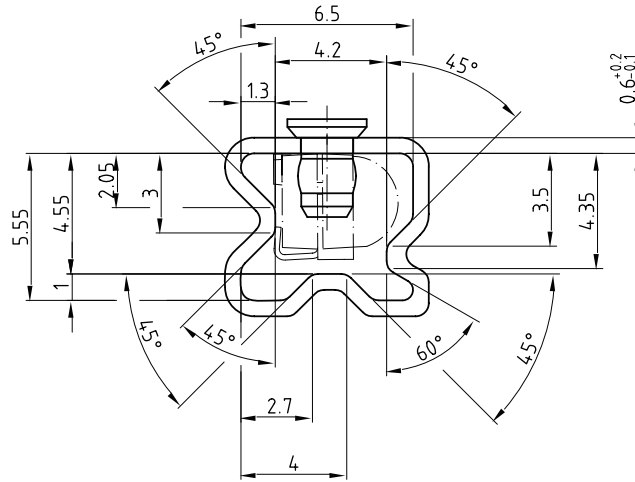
Tape drawing,TFDU8108 for top view mounting, tolerance ± 0.1 mm
